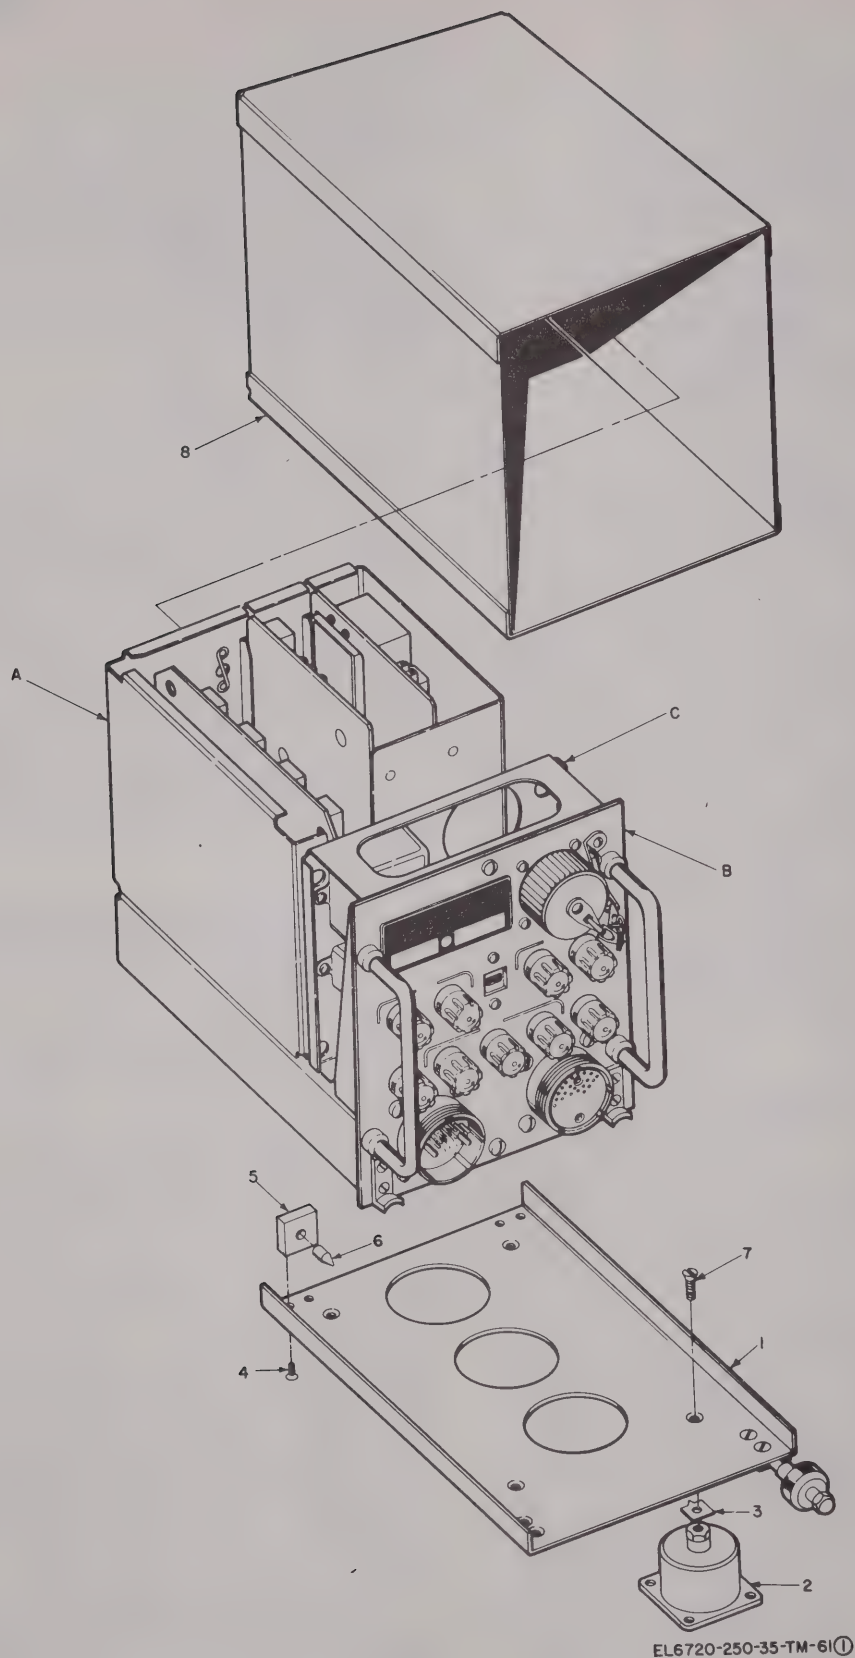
(1). Photo system assembly, exploded view (sheet 1 of 4).
